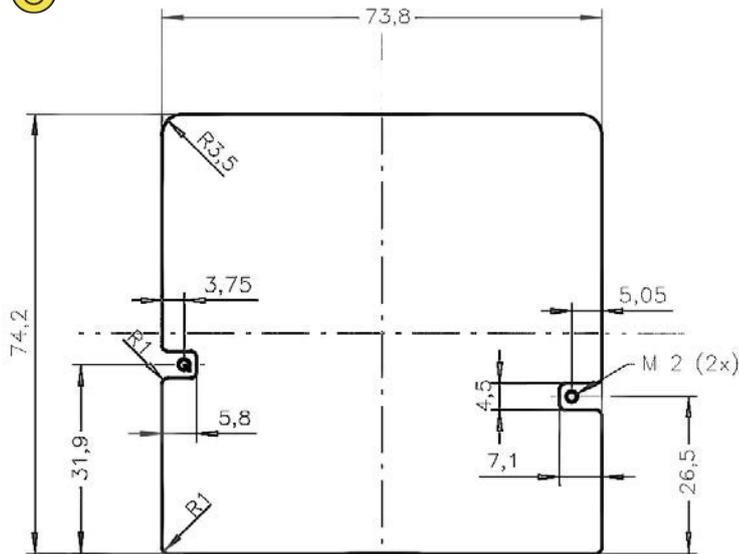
Dimensions front panel installation of GPT-4352 in mm
